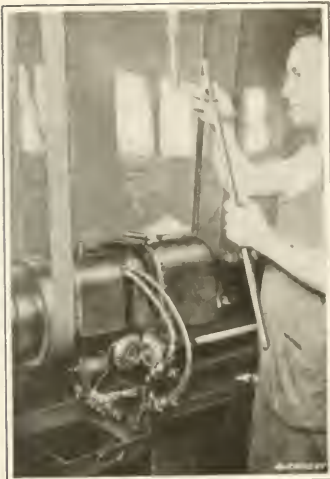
Gaging Accuracy of Gun Barrel after Reaming
